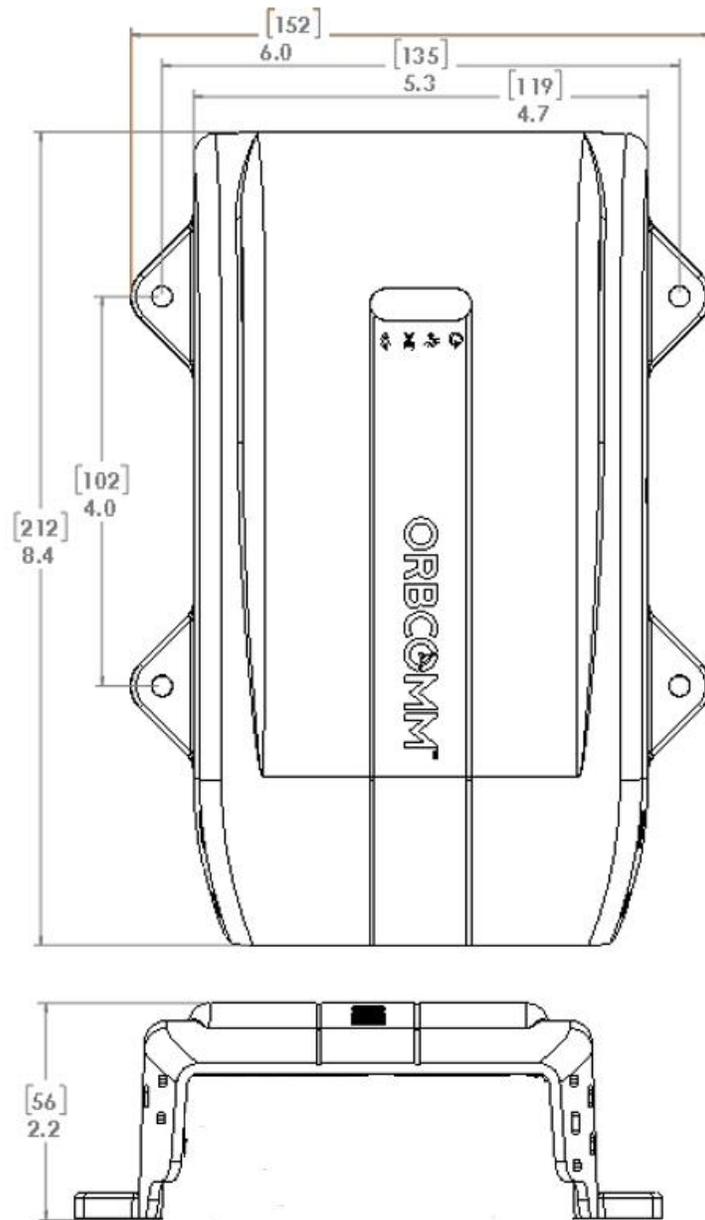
Low Elevation Antenna Height Dimensions (mm)
